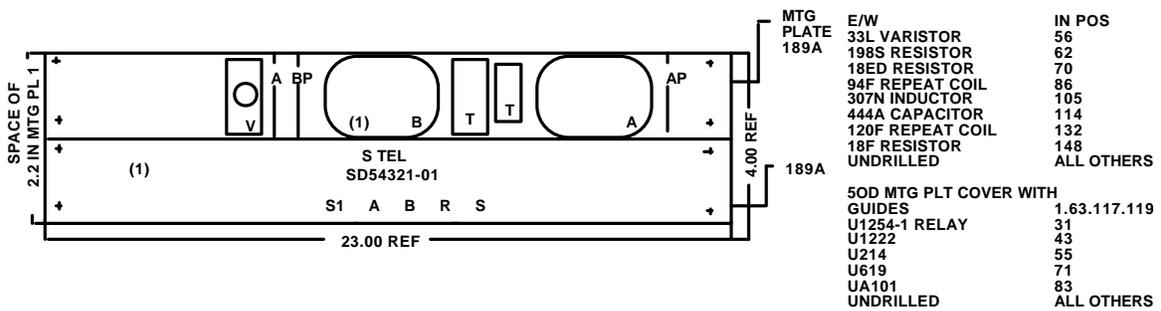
P Equipment Assembly, Mounting Plate Unit-Main View (With Stocklist)
